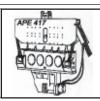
L4. Hydraulic Clamp Manifold Assembly.
